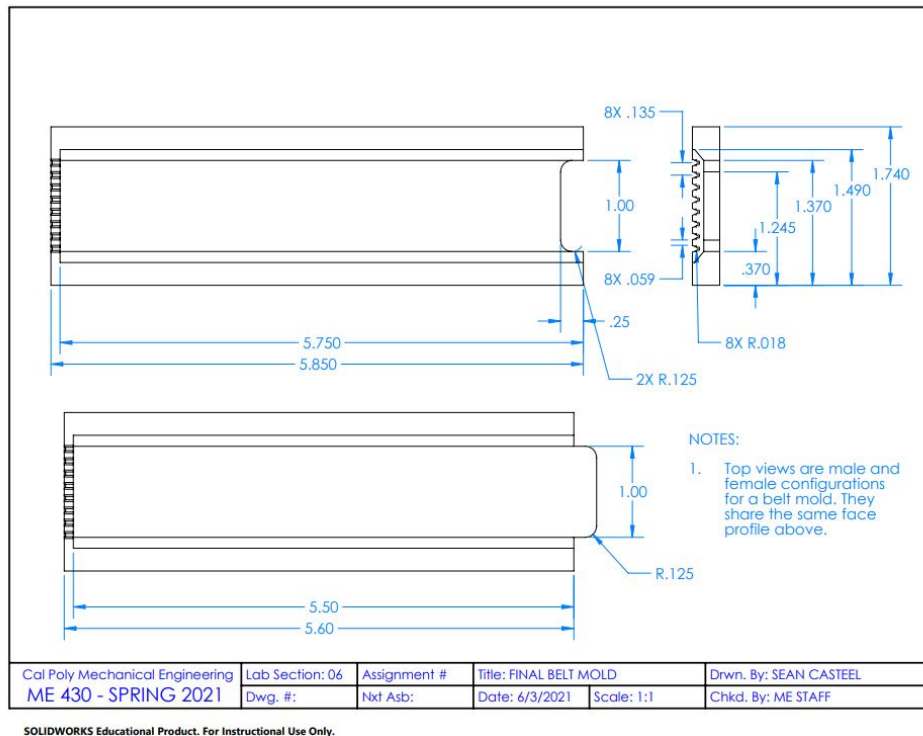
Left Pressure Belt mold in 0.063" via a 5-hole configuration
